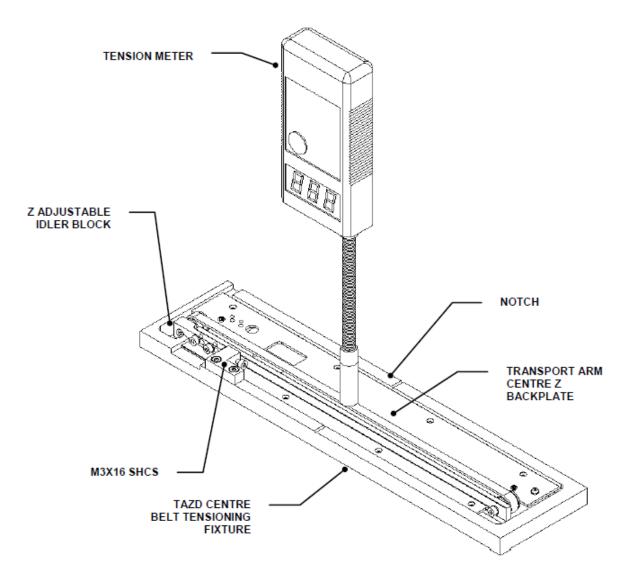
Inserting the Assembly in the Tensioning Fixture
